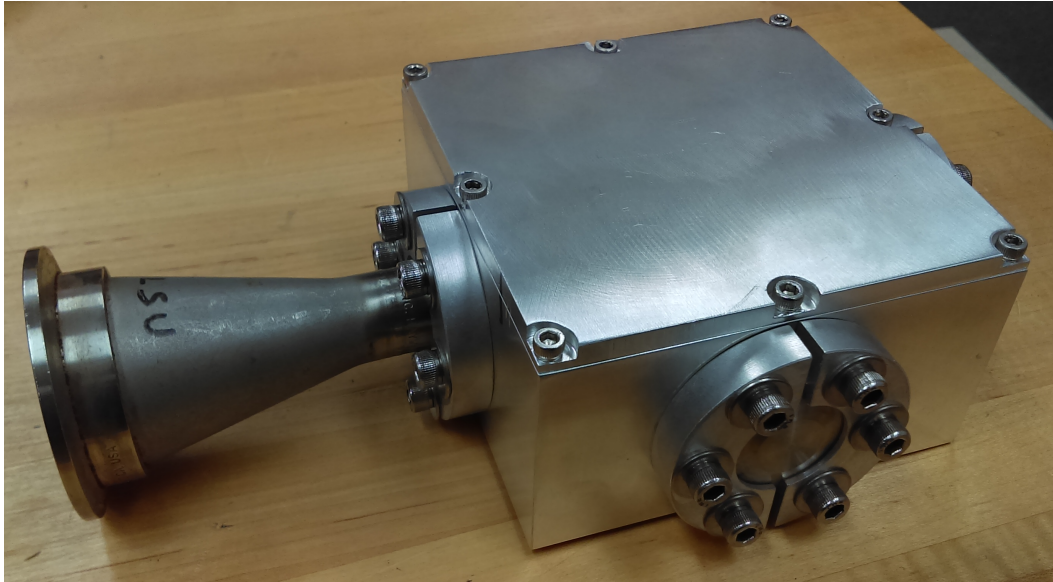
Picture of the vacuum chamber built for the project, made of aluminum, and showing the KF-16 pipe, centering ring, blank, and bulkhead clamps. The blanks can be removed to connect the pump and the end line of the system. The top flange this bolted down to the base with 4-40 bolts and a custom o-ring in between.
